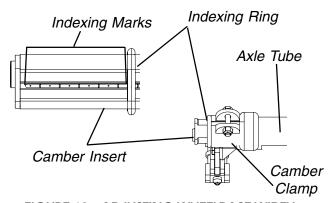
ADJUSTING WHEELBASE WIDTH
